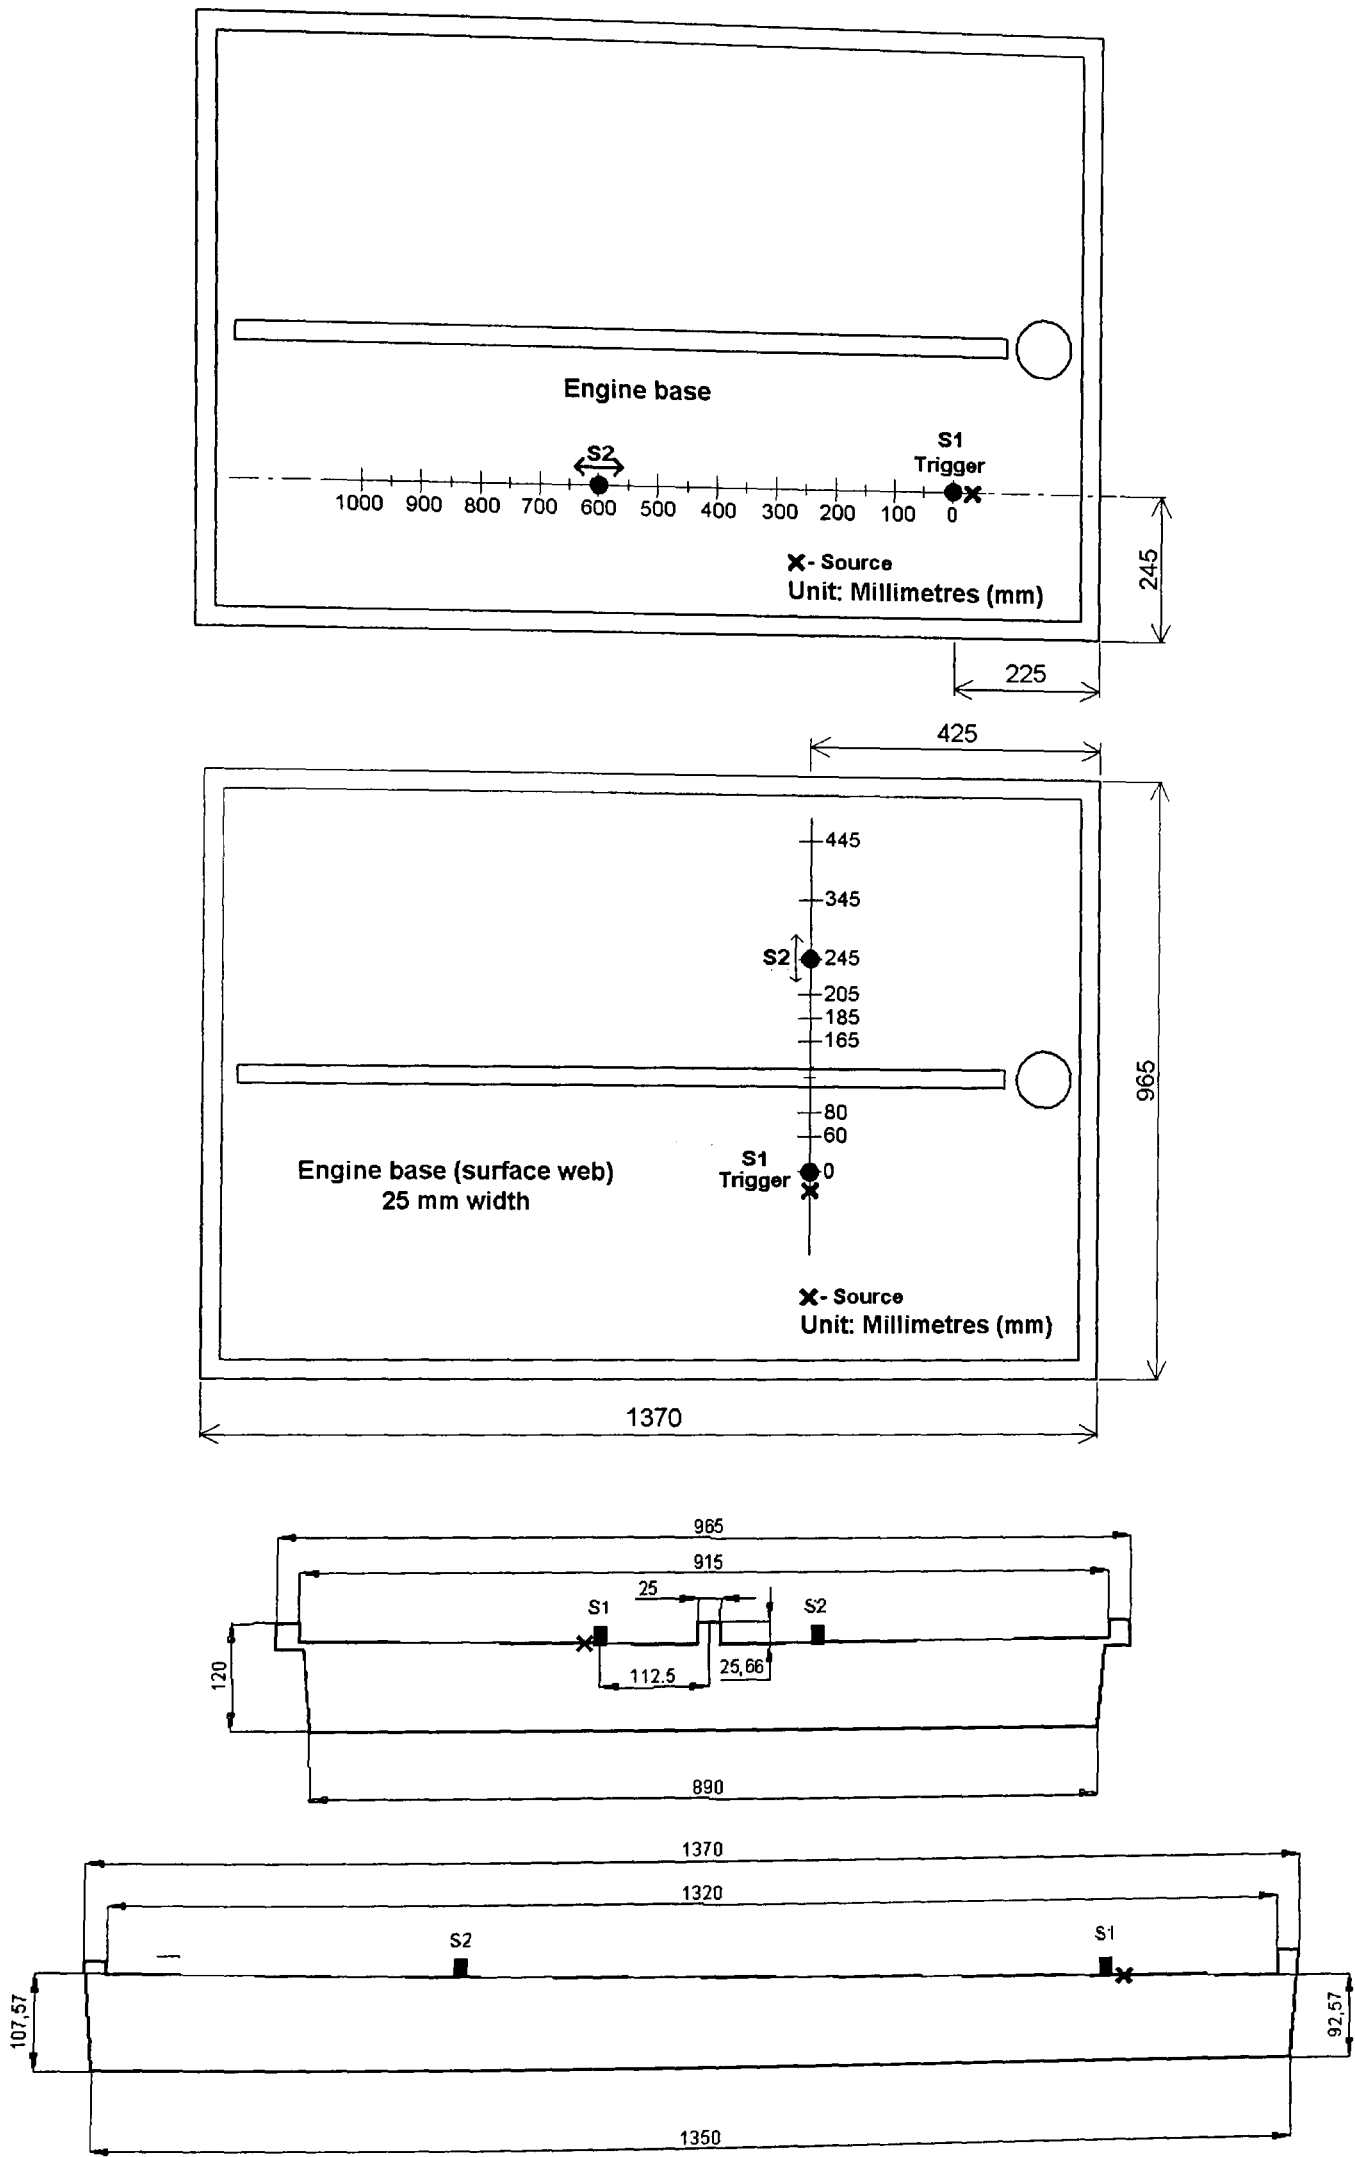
Drawings and dimensions of the engine base and source-sensor positions
